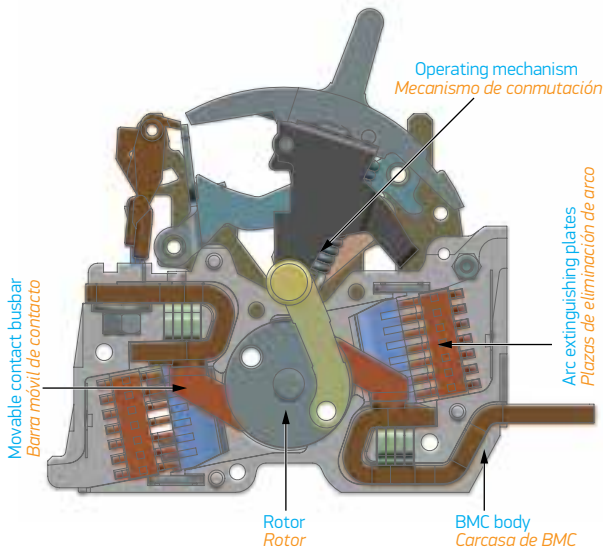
Side view application of rotating contact breaking system to arming mechanism of LV circuit breaker
